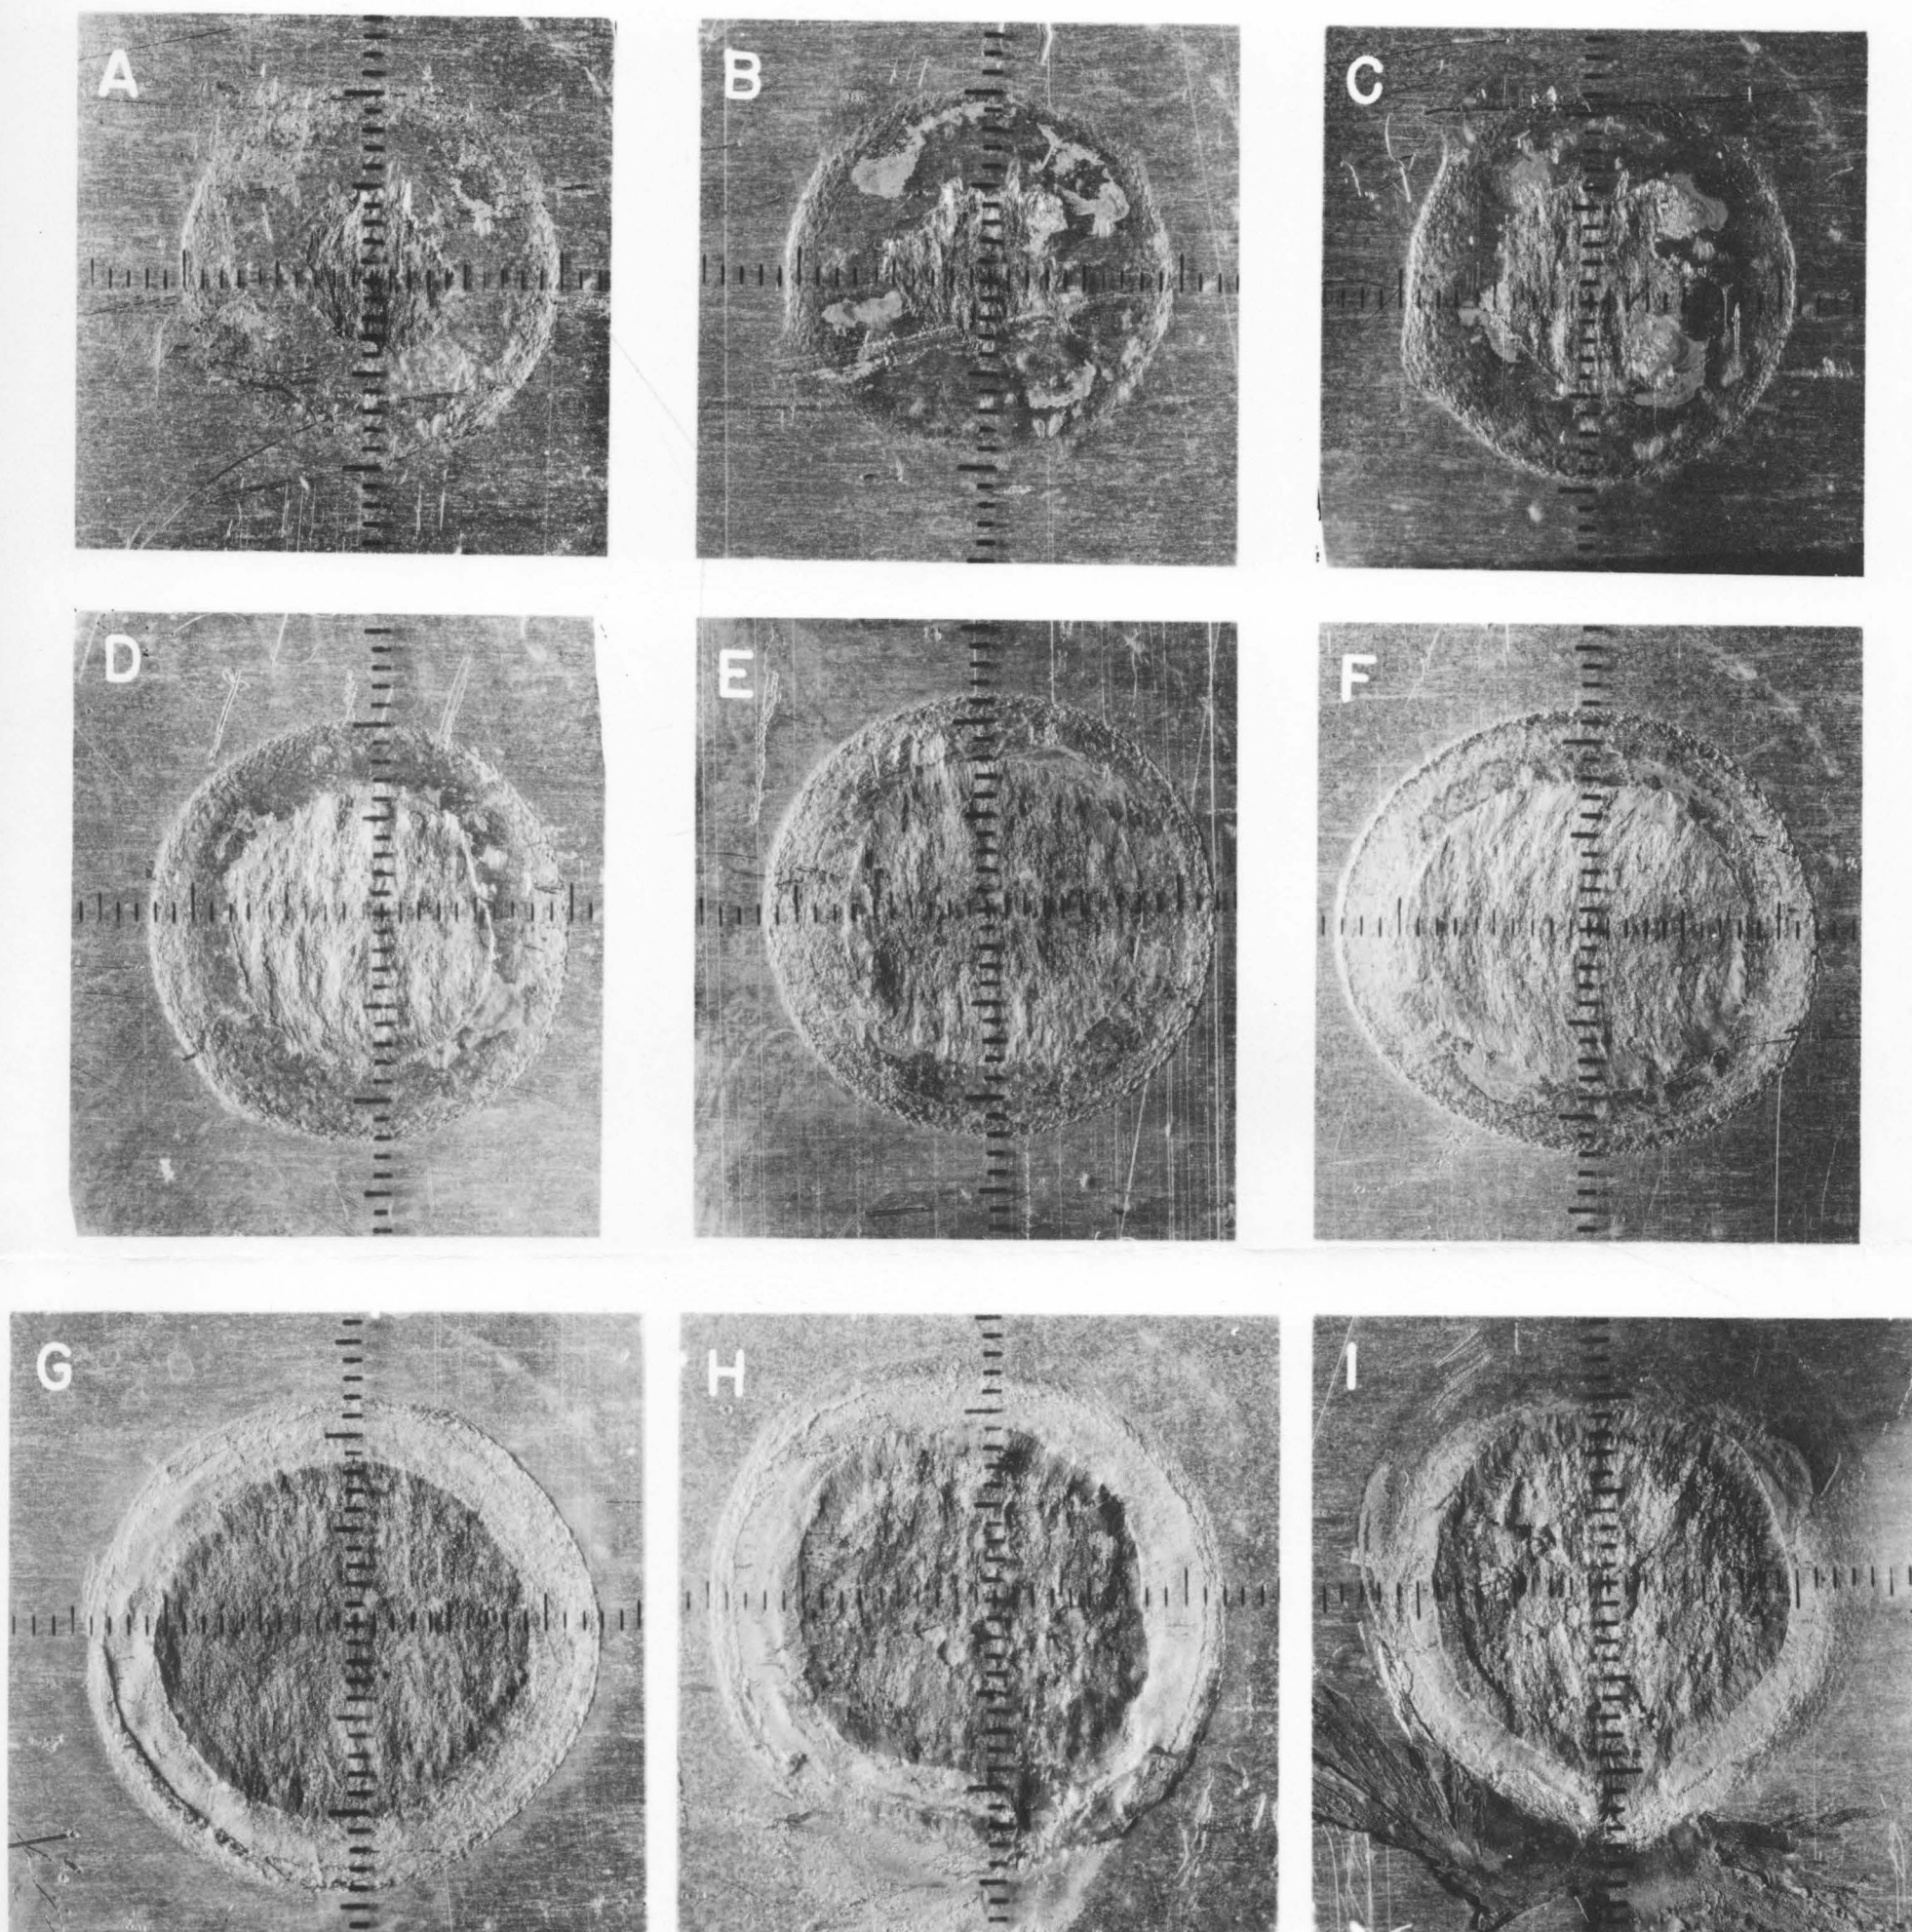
INDICATIONS OF THE RING ELECTRODE TWO SIDE DIRECT CURRENT TEST FOR TYPICAL SPOT WELDS (FAYING SURFACES SHOWN AFTER SHEAR PULL TEST.)
